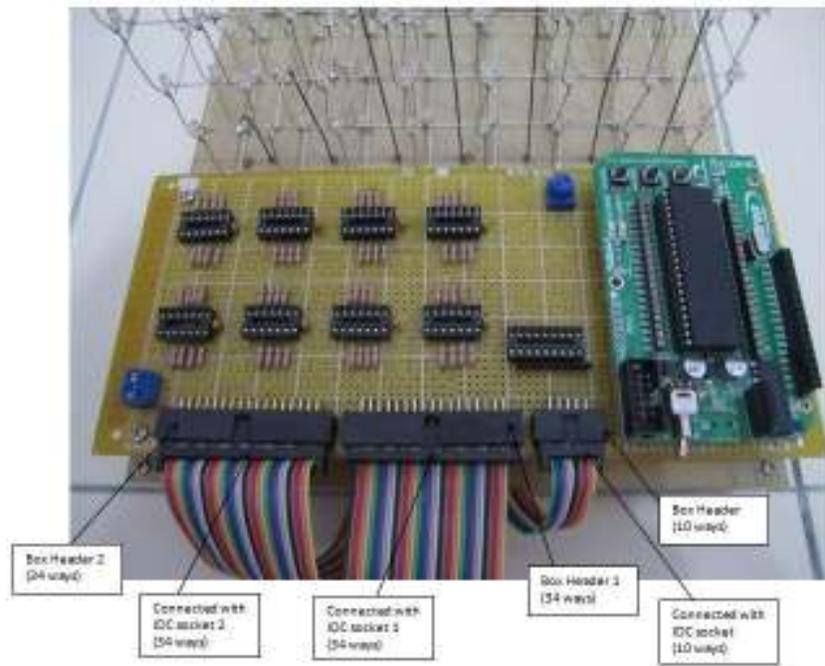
How the microcontroller circuit board will be placed on the base as it is completed
